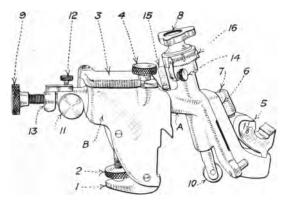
Norton steady rest. This illustrates the design of steady rest as used on the 6 in. and 10 in. machines. (Norton Grinding Co.)
